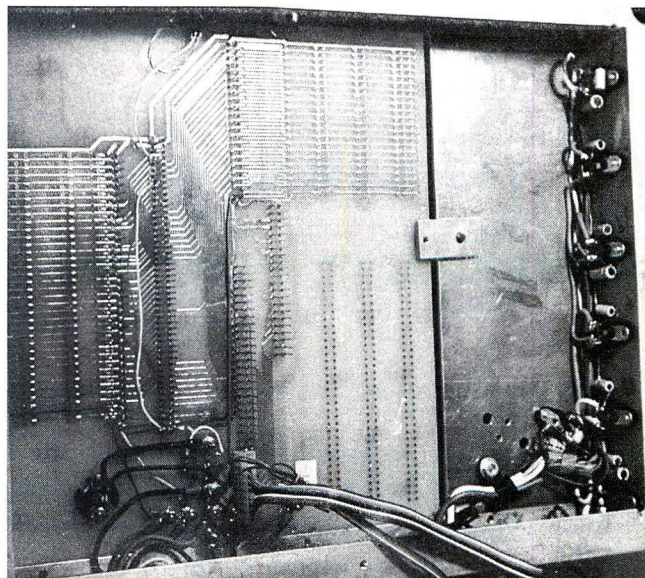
Bottom View of Main Chassis Mother Board In Center, a Molex Socket on End of a Ribbon Cable Connecting Keyboard. On End, Back of Regulators.
